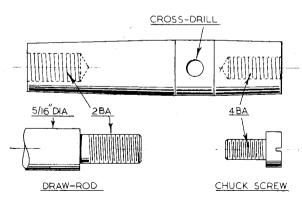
A drill chuck arbor tapped for a draw-rod and a securing-screw
